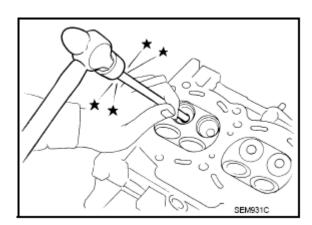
Driving Out Valve Guide (EXH) Using Press/Hammer Courtesy of NISSAN NORTH AMERICA, INC.
